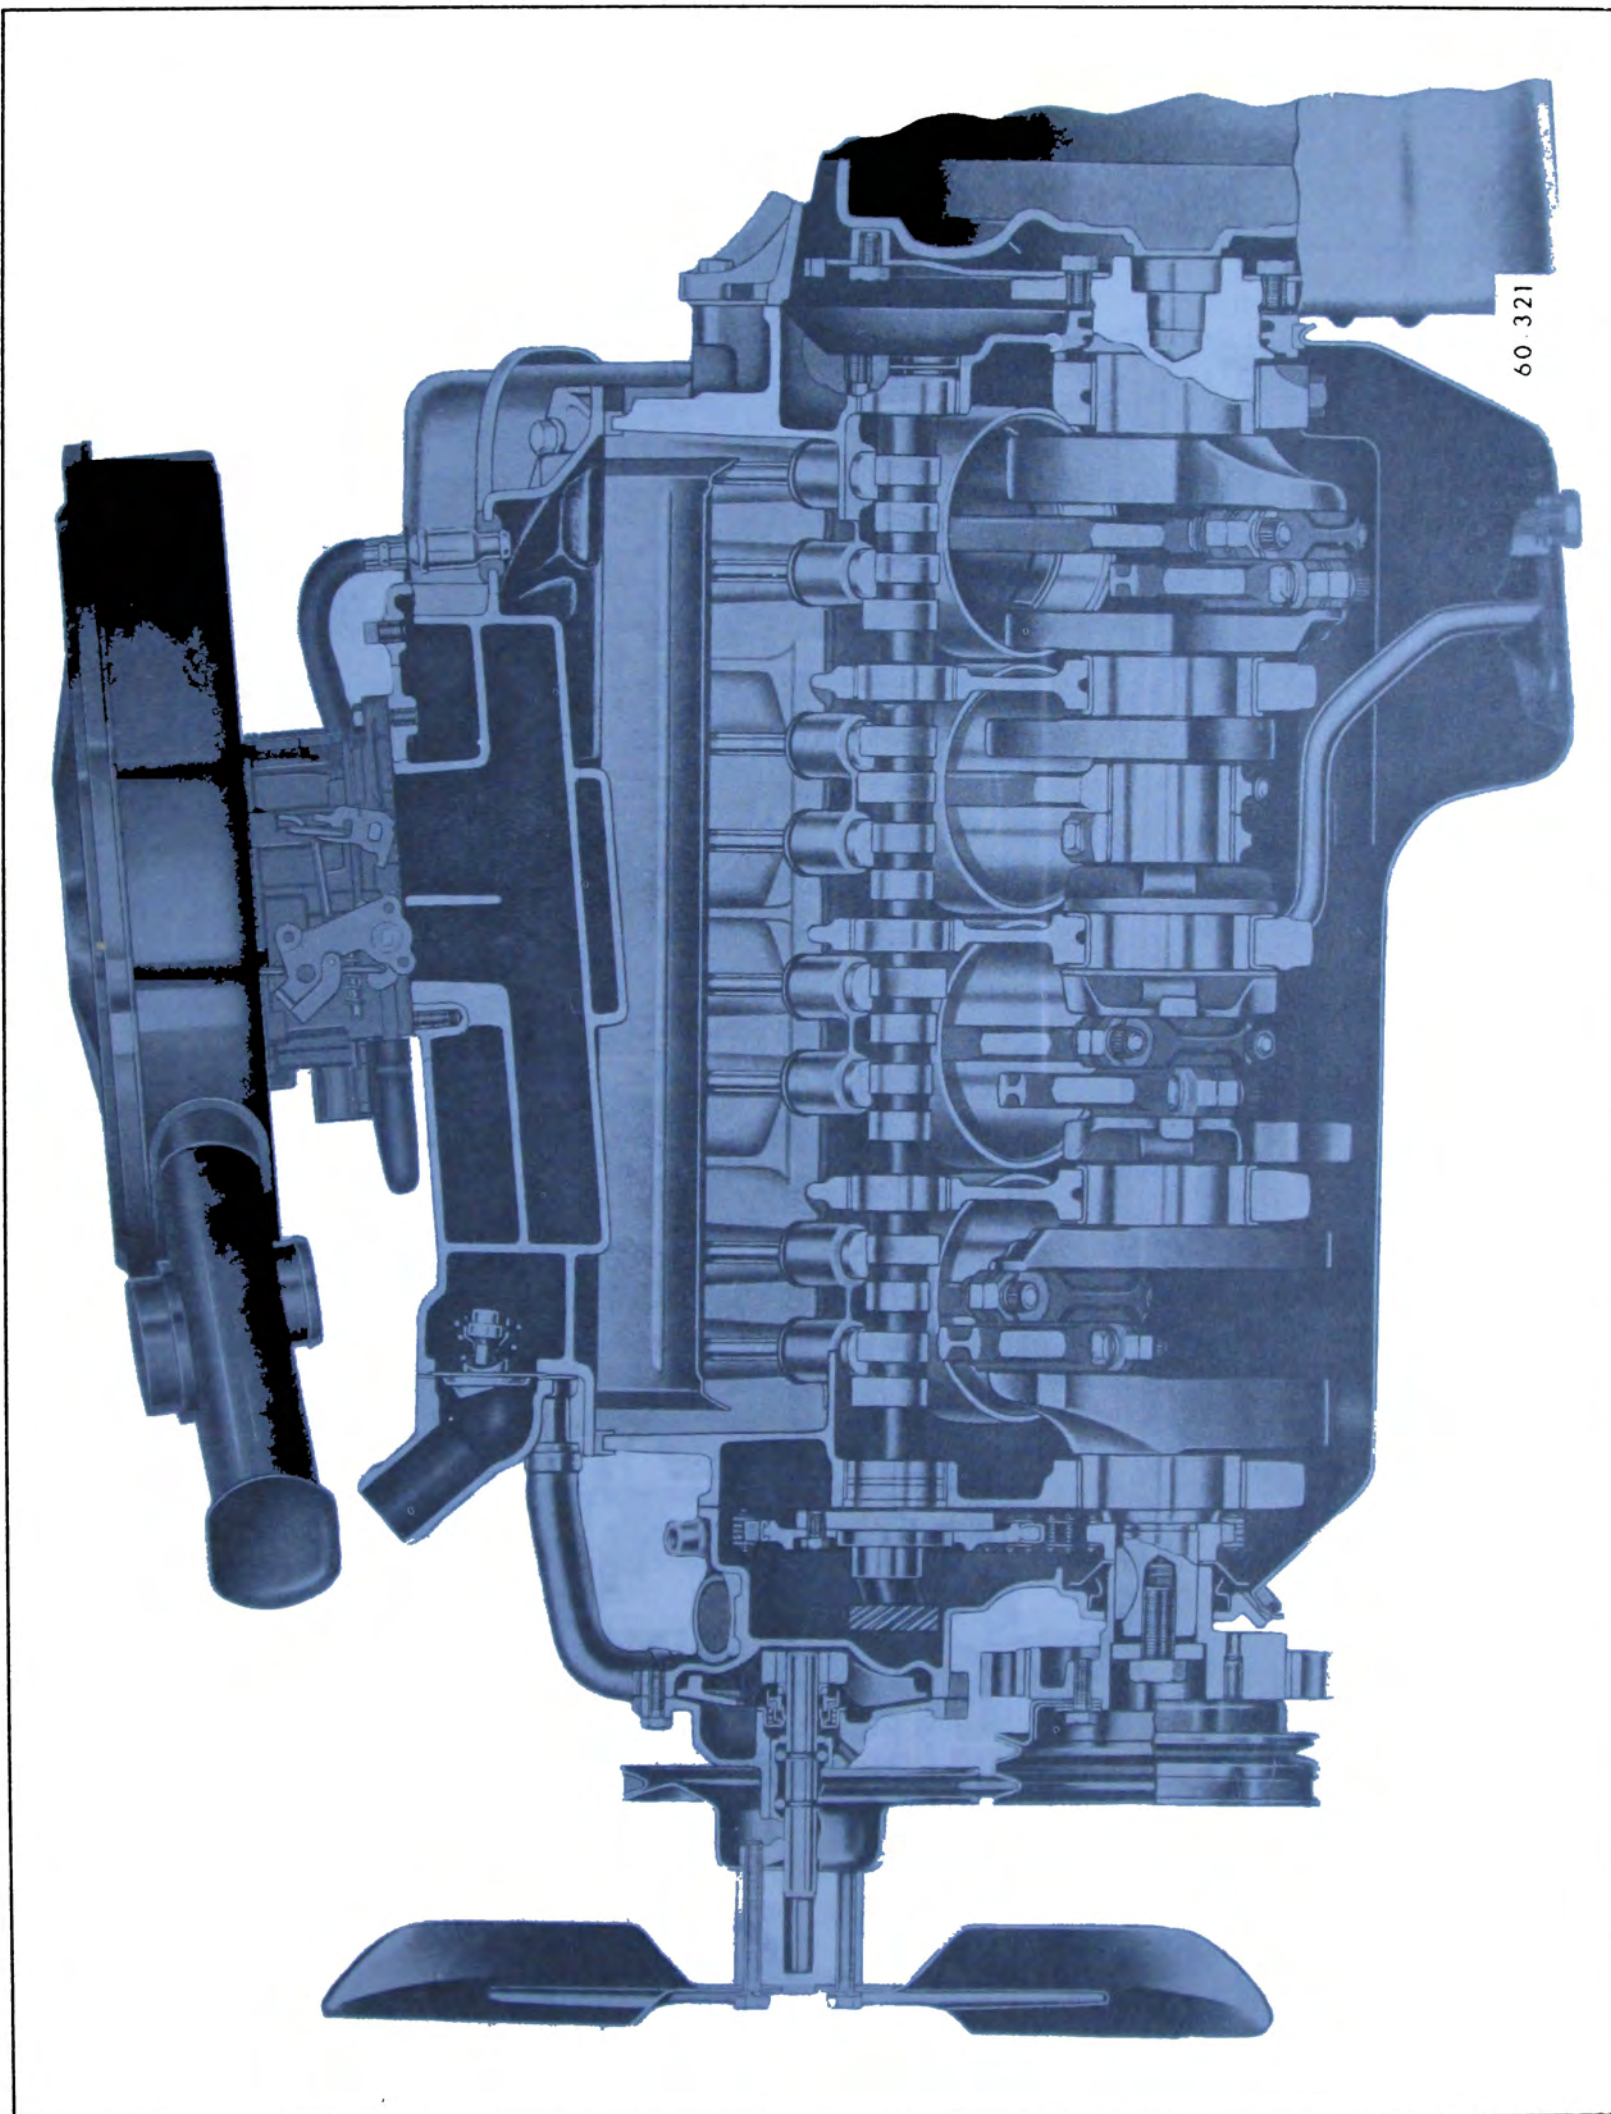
400 Cubic Inch - Side Sectional View
